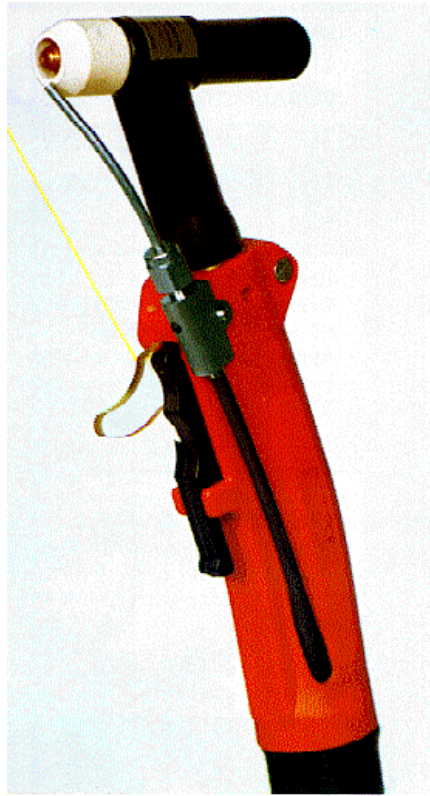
Plasma Welding Torch with Cold Wire Feed (Hughes, 2002)
